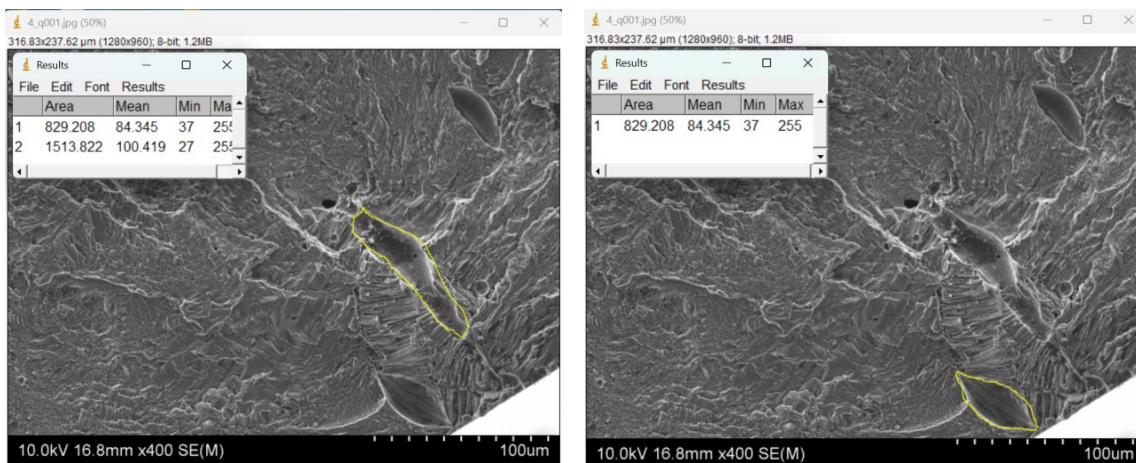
Defects initiated fracture for CD//BD-HT sample tested at 170 MPa.
